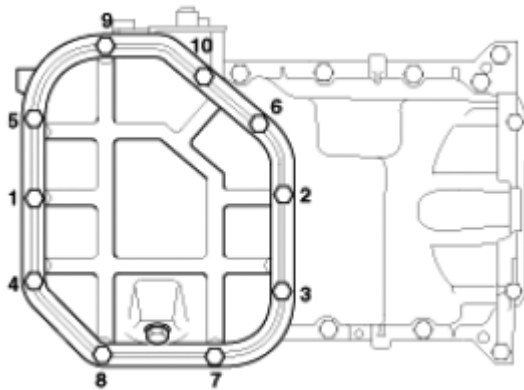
Locating Lower Oil Pan Bolts Tightening Sequence
